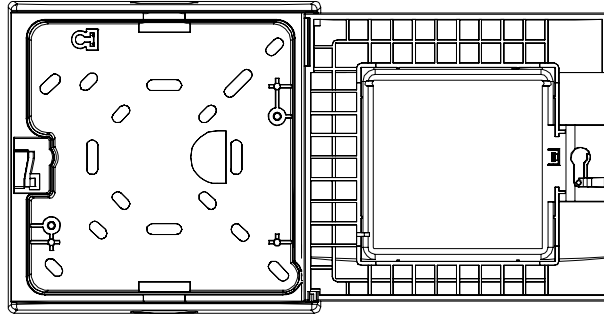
Housing FDMH297-R with breakout points for cable entries and screws (cable entries and screw holes are compatible with old housings)
